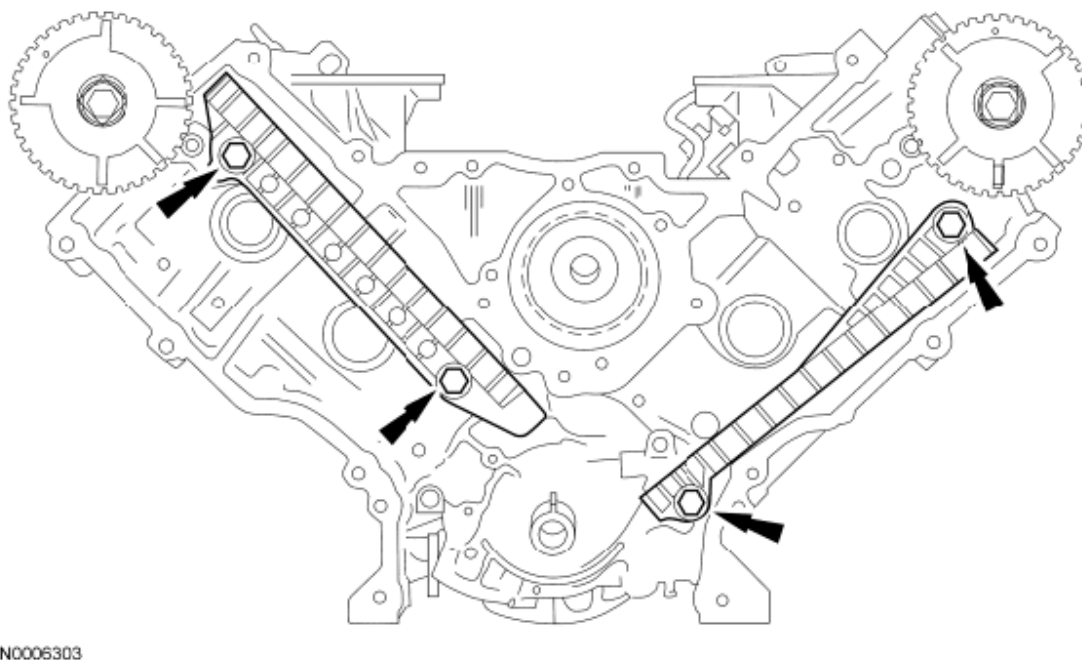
Locating LH/RH Timing Chain Guides And Bolts
